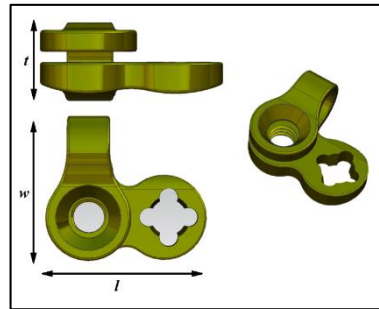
Front (upper left), top (lower left), and trimetric (right) views of connector and basic dimensions.
